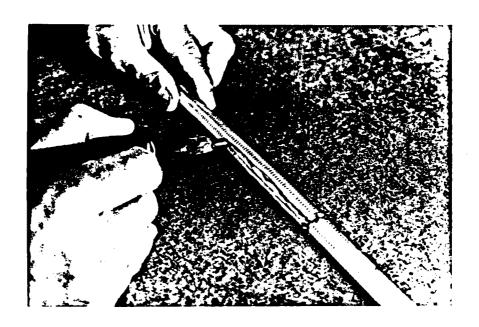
REMOVING OUTER JACKET WITH SOLDERING IRON-LONGITUDINAL SEPARATION
